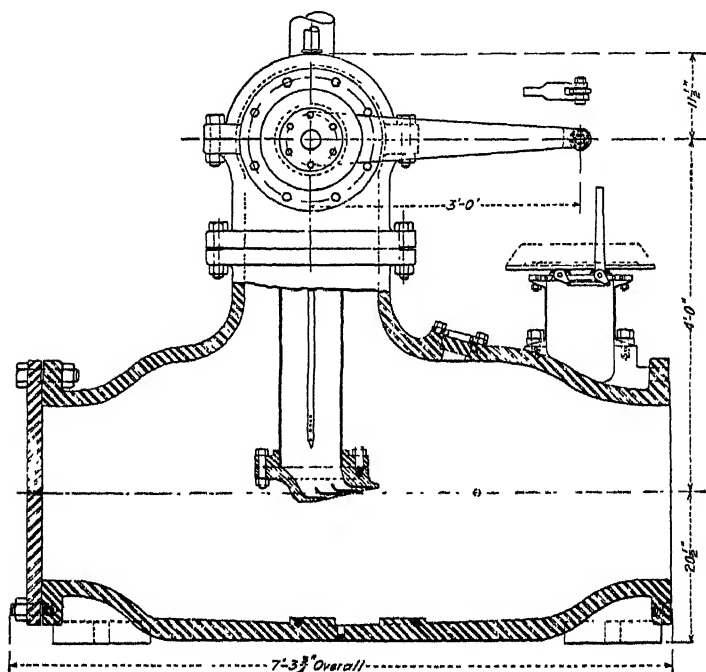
NOZZLE-TESTING MACHINE—SIDE ELEVATION
